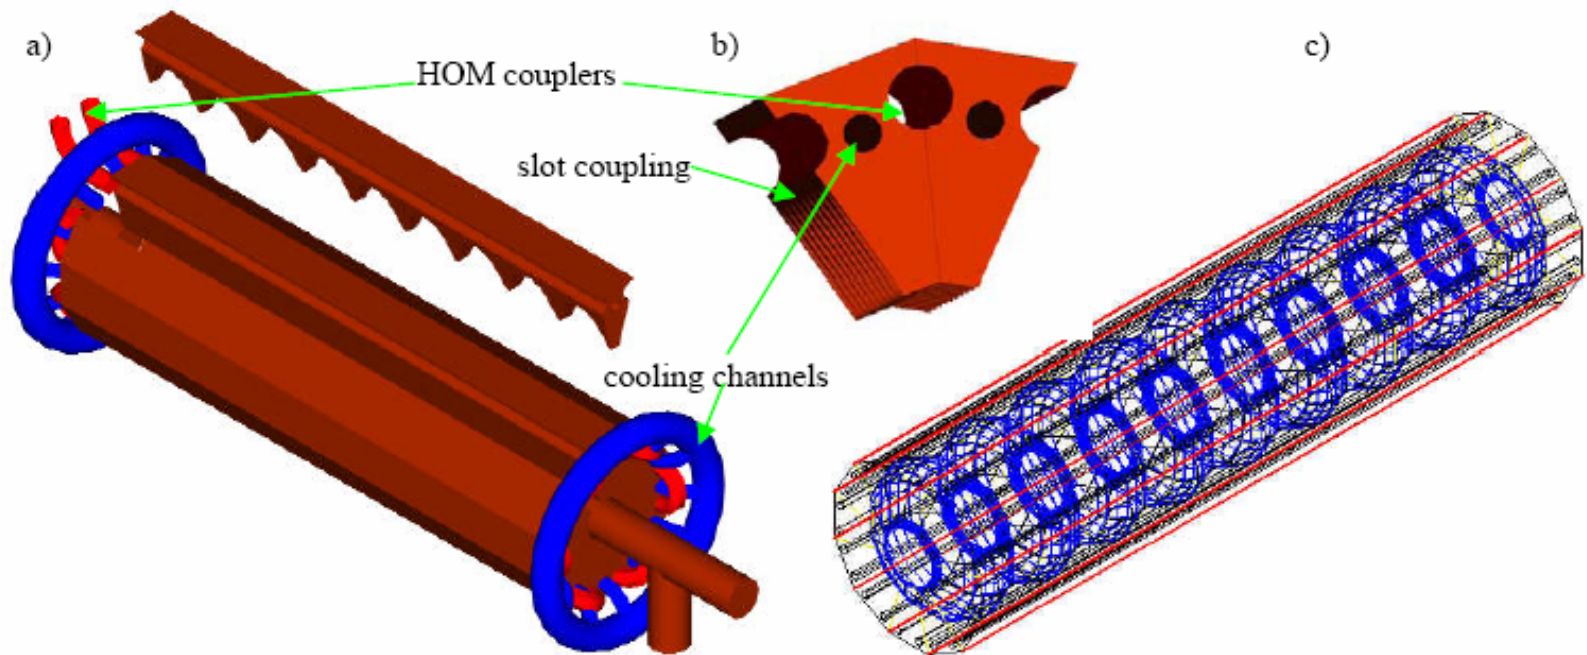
Assembly of 12 segments to make a polyhedral cavity module. a) polyhedral assembly, one segment with-drawn; b) detail of slot-coupled HOM waveguide and cooling channels; c) wire-frame showing interior cavity surface.
